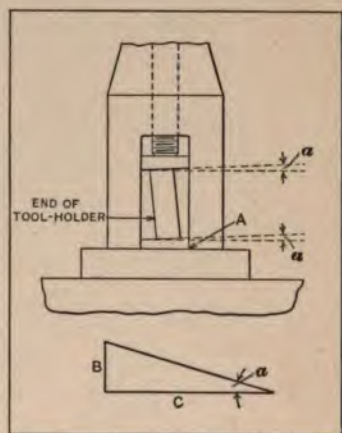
Thread-cutting Tool clamped between Taper Strips for Holding it in Alignment with the Thread Groove
